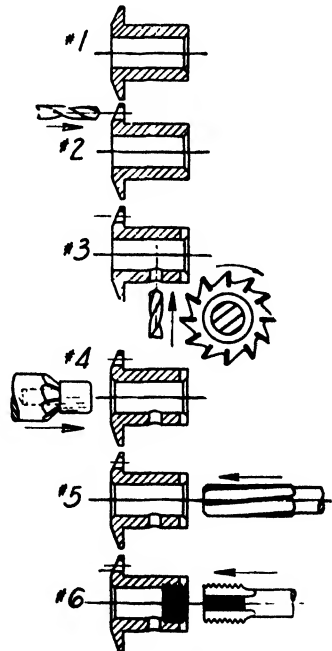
Sequence of Operations on Automatic Bushing Machine.
